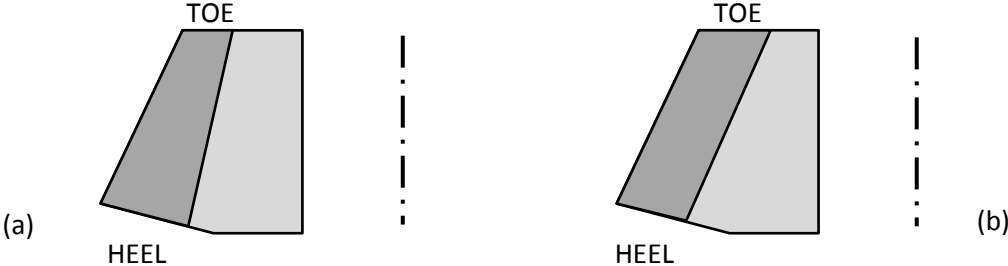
(a) Face-milled and (b) face-hobbed gear tooth
